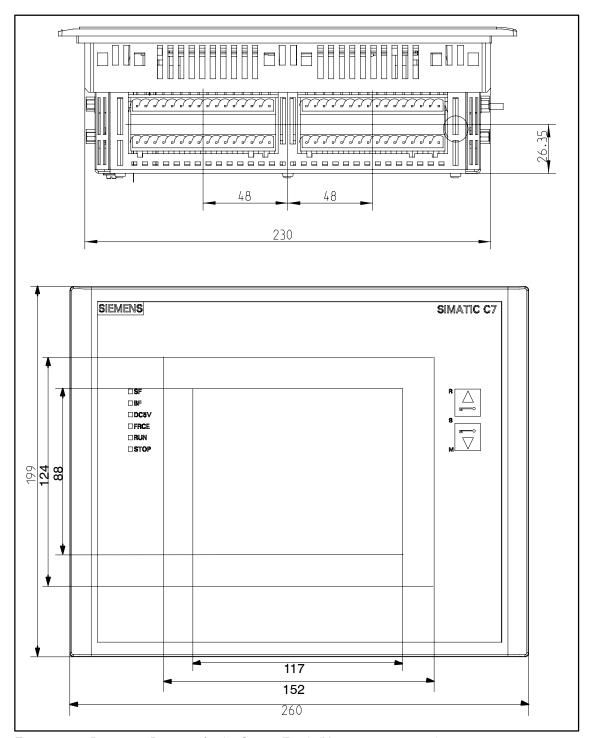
Dimension Drawings for the C7-635 Touch (Measurements in mm)
